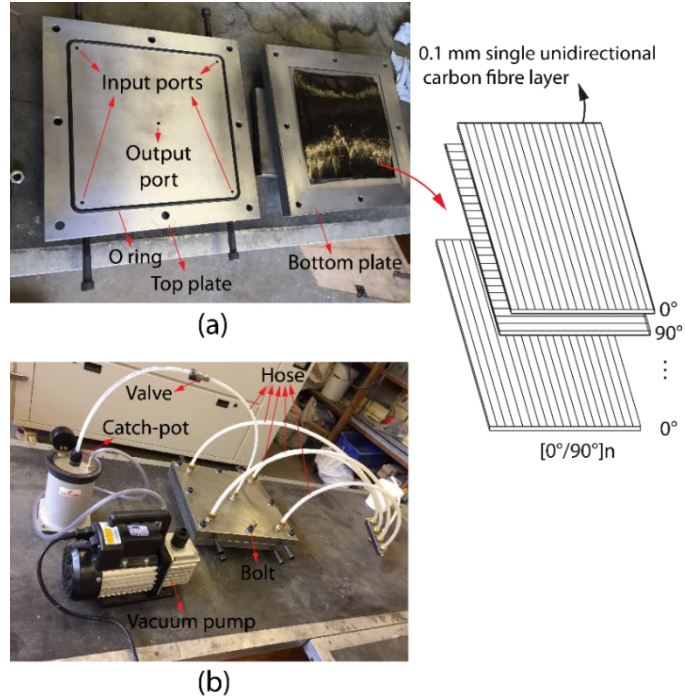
The vacuum assisted resin transfer moulding system (VA-RTM) (a) before and (b) after assembly. The sketch in (a) shows the unidirectional carbon fibre layers with orthogonal stacking.
